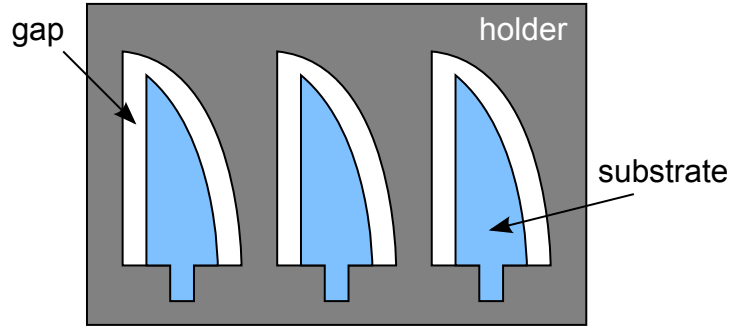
Scheme of a typical sample holder used to coat e. g. knife blades.
